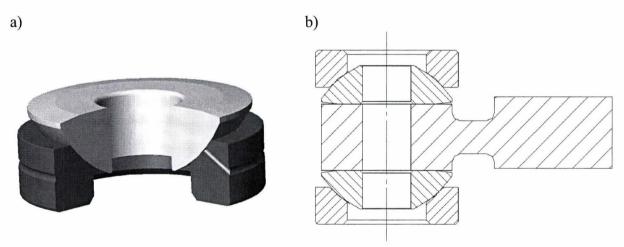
Axial spherical plain bearing a) layout bearing b) implementation bearings
